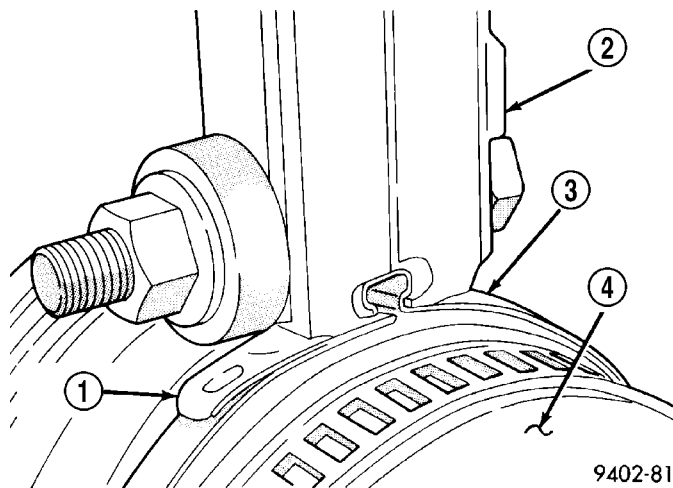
Sealing Boot Retaining Clamp Installed
